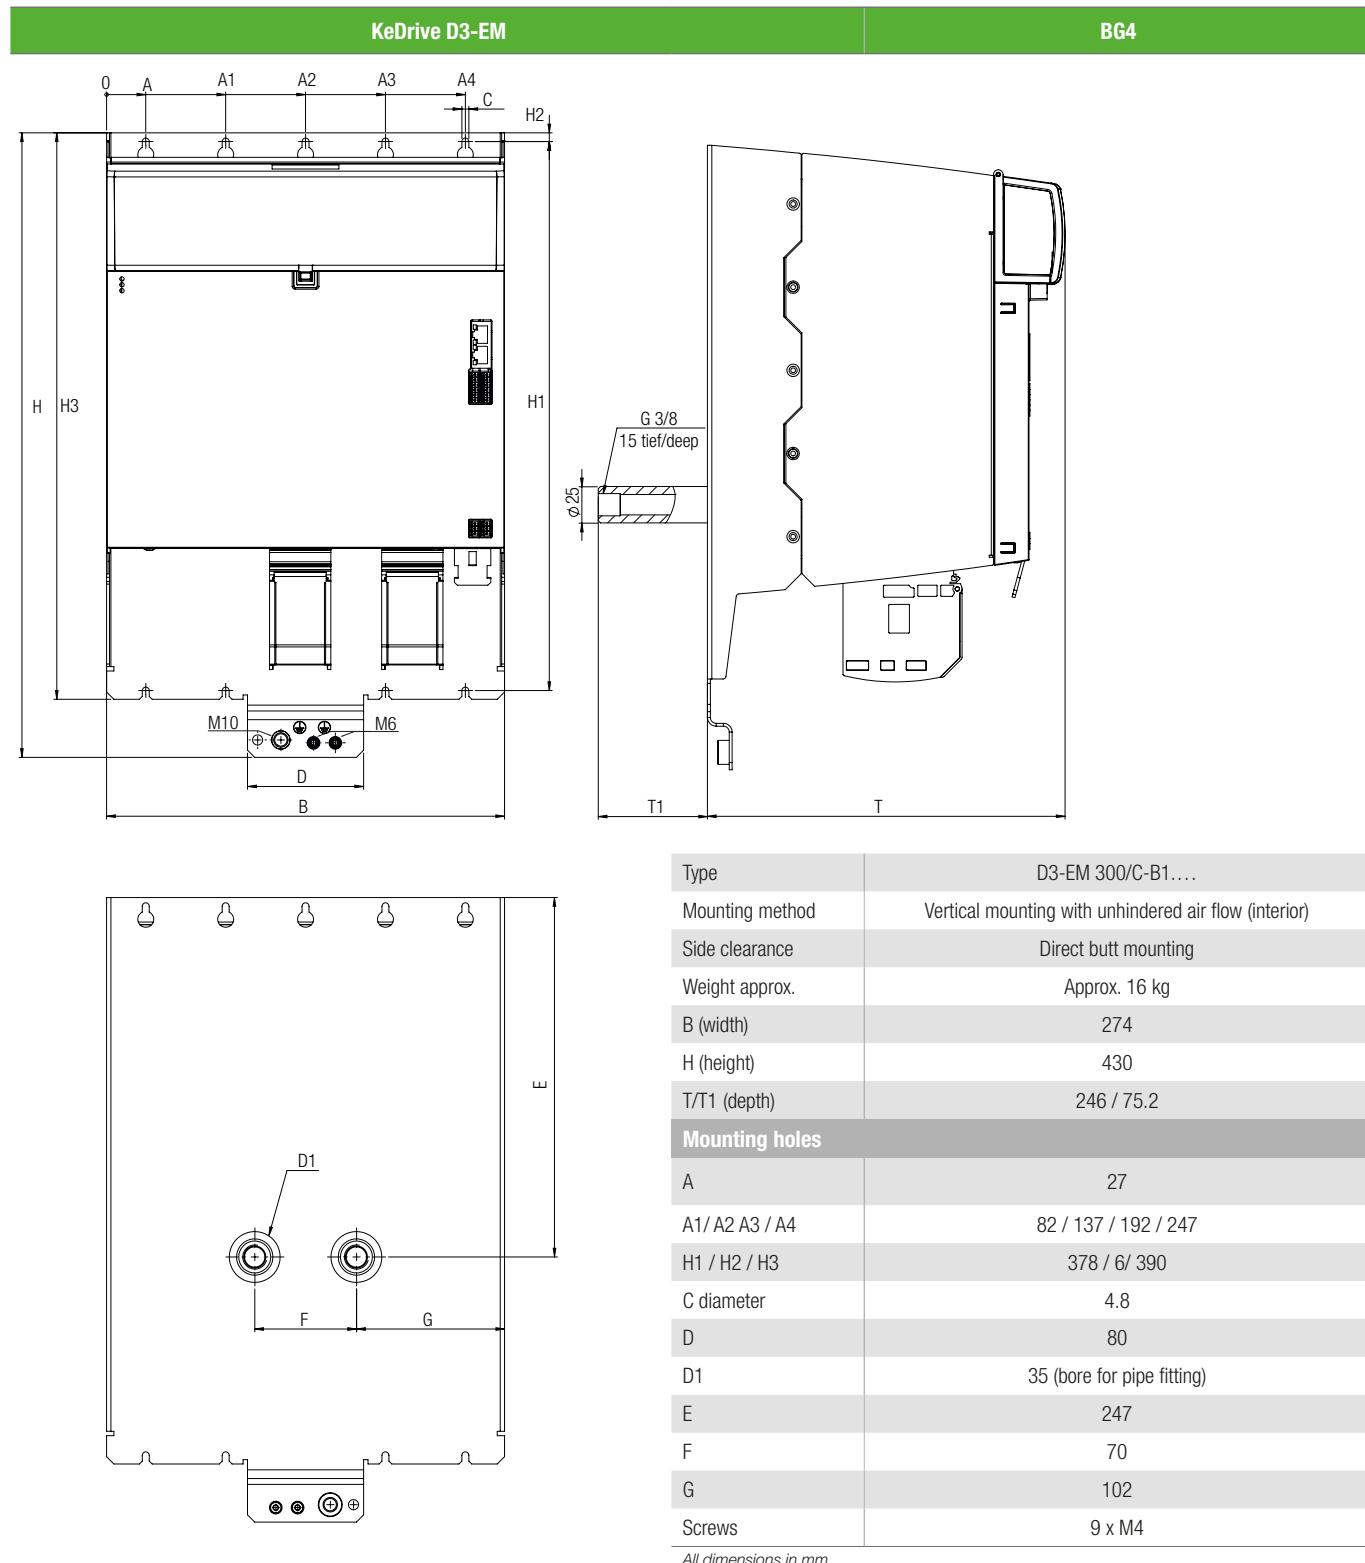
Dimensions, KeDrive D3-EM BG4 liquid cooling
